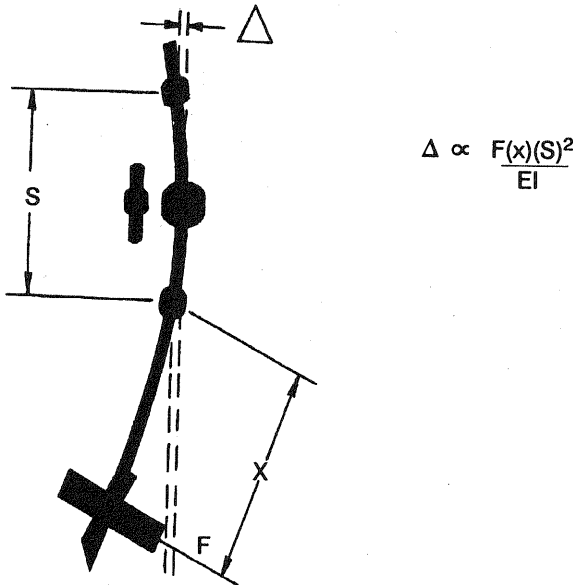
Deflection of a shaft which is directly coupled to the reducer bearings
